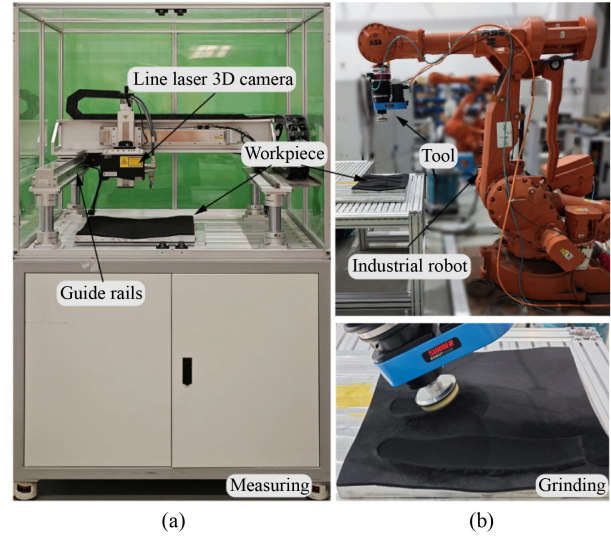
Grinding experiments setup. (a) Measurement equipment. (b) Grinding equipment.
